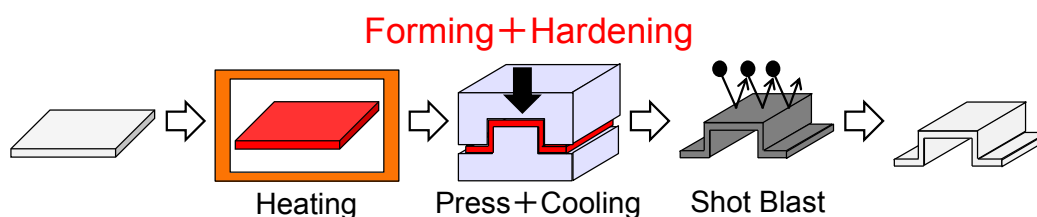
Hot-stamping process with non-coated steel sheets.
